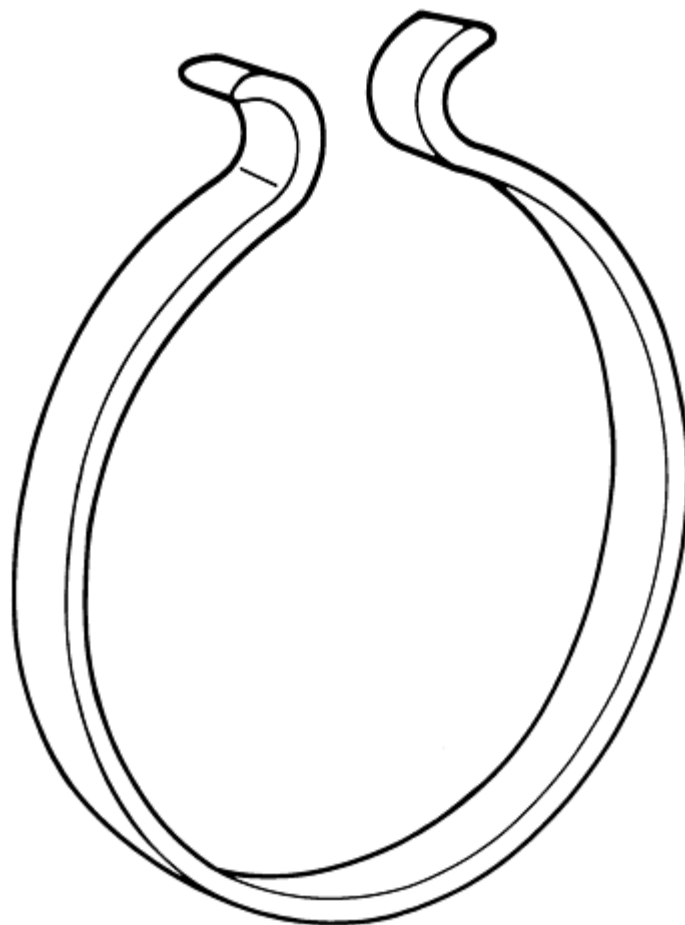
Spring clip representing a type of beryllium-copper part that should be partially aged without a fixture and then placed on a mandrel for final aging, for control of diameter
